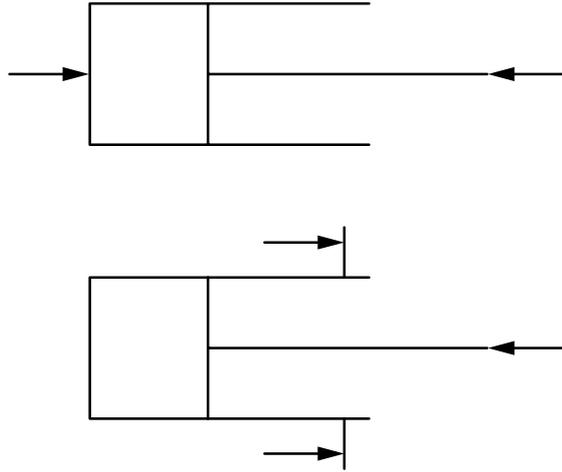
Cylinder bottom, supported (upper) and unsupported (lower)
